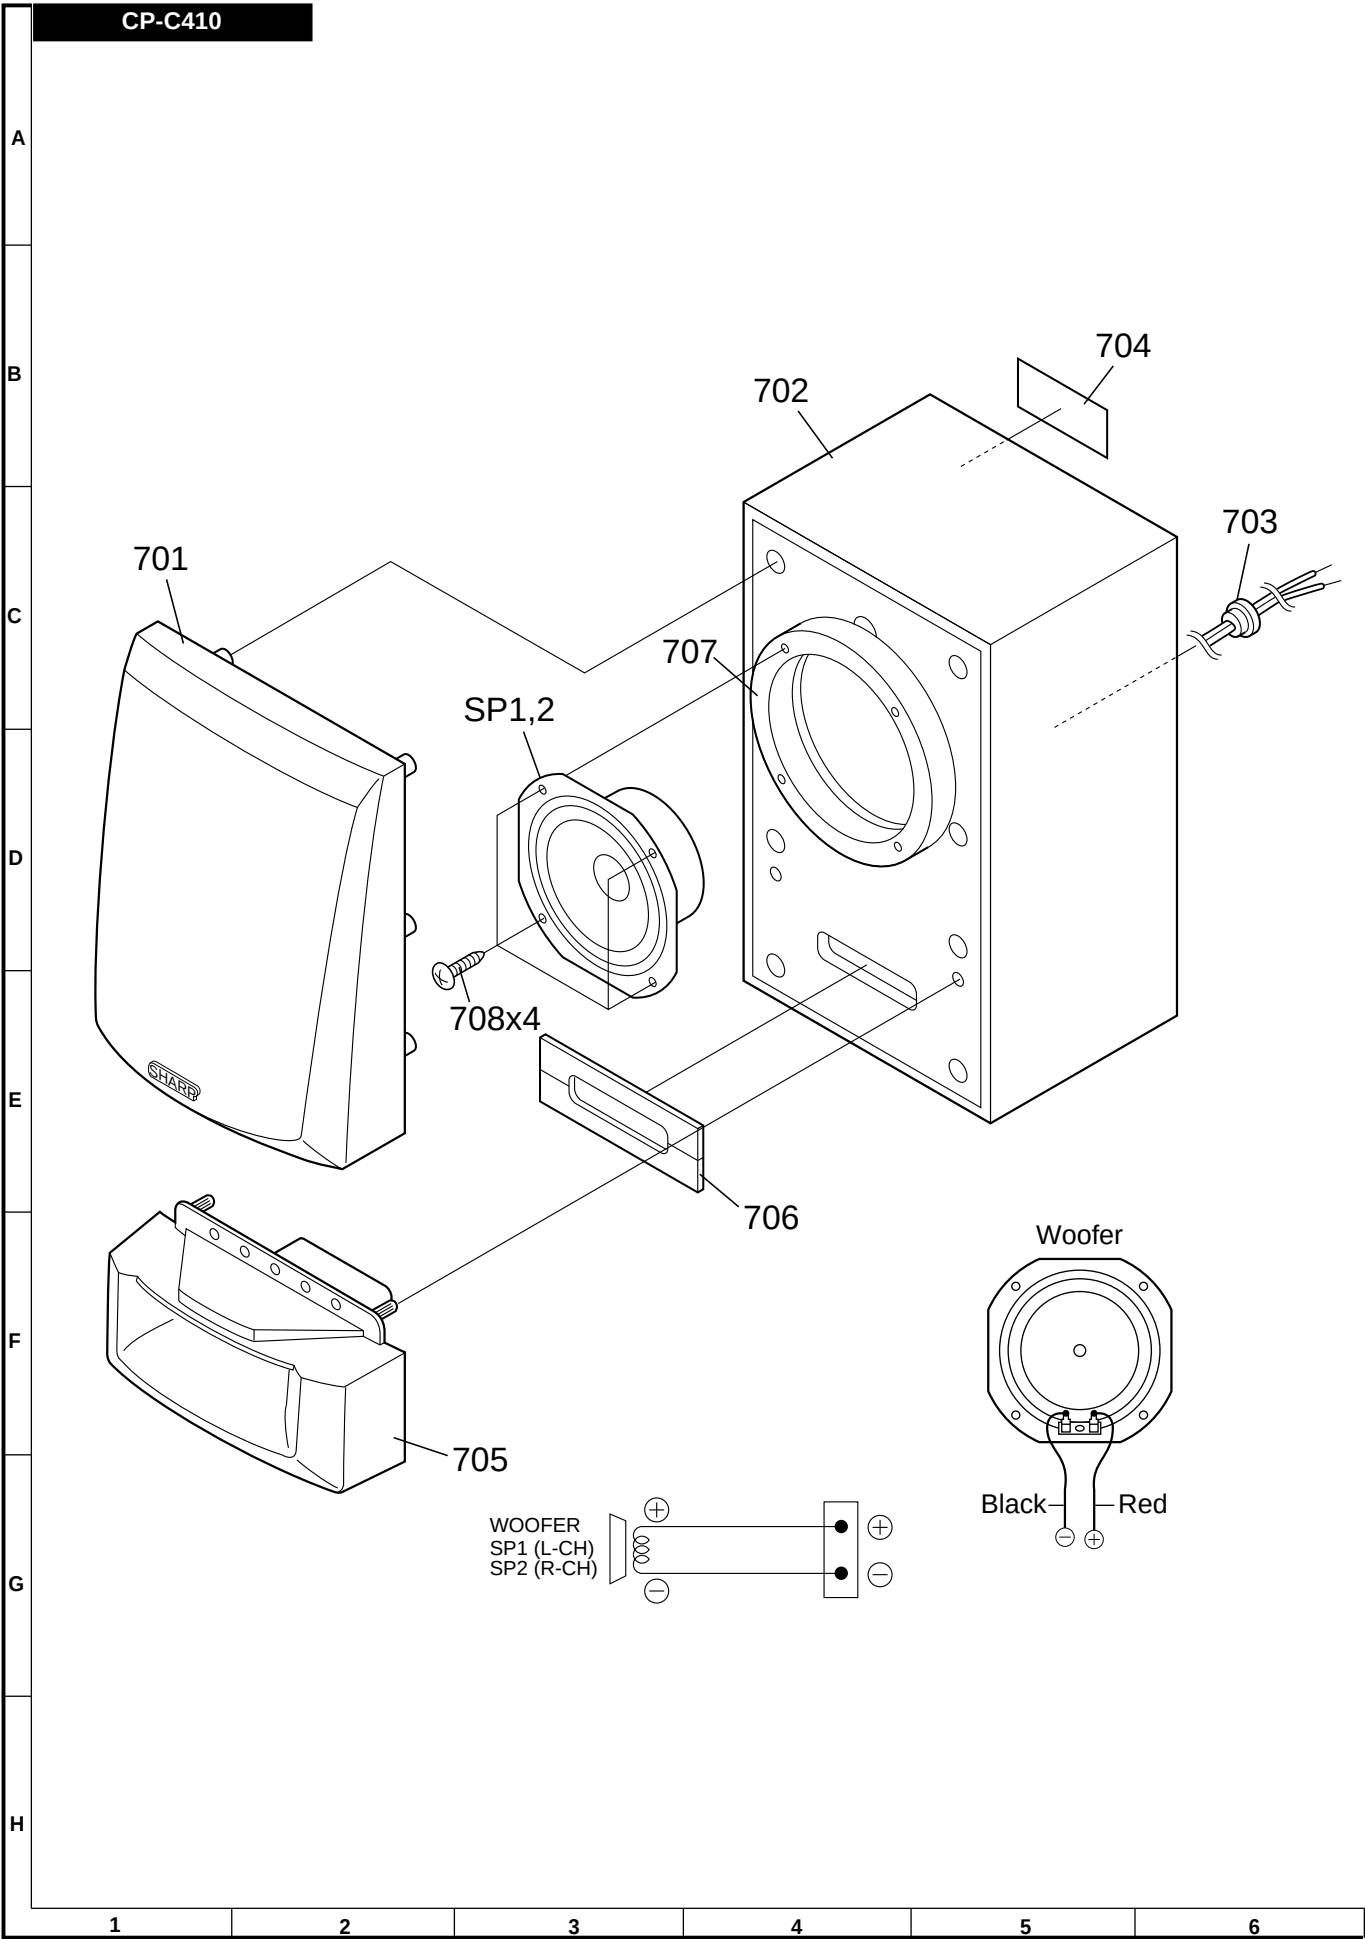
SPEAKER EXPLODED VIEW (1/3)
